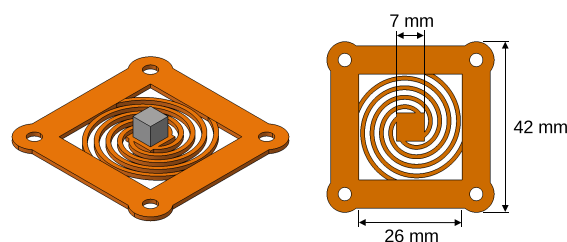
Suspension with spiral shape, (left) isometric view with magnets on top and bottom, (right) top view without magnets
